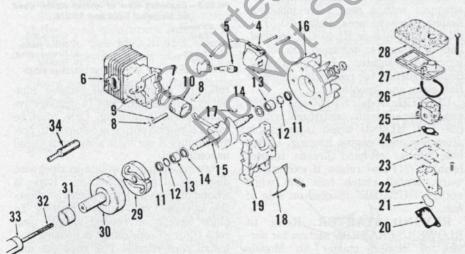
Exploded view of engine used on Models ST-160, ST-180, ST-200 and ST-210; adapter (34) is used in place of clutch components (29, 30 and 31) on Models ST-160 and ST-180. Model P100-1 Waterbug is similar but clutch components are not used. Thrust washers (14) on Model P100-1 are equipped with tangs which must index in crankcase (19).
